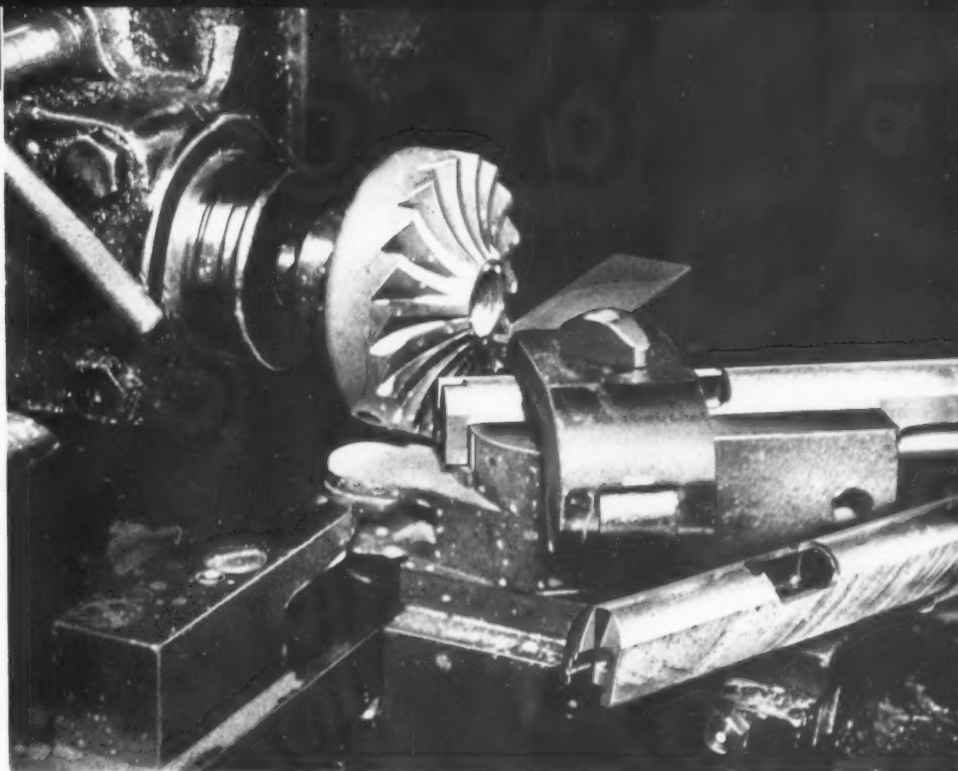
Two Locking Grooves are being Milled at the Top of the Inside of the Slide just in Front of the Carriage Outlet. A Small Cutter is Used at the End of a Long Spindle Supported by an Arm
